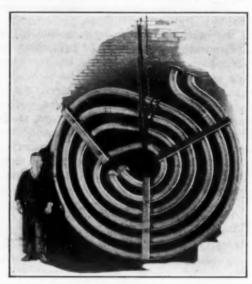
Welded Copper Coil for Heating Kettle Horizontal coils of this type can be economically made on the job by the use of oxyacetylene welding equipment.
